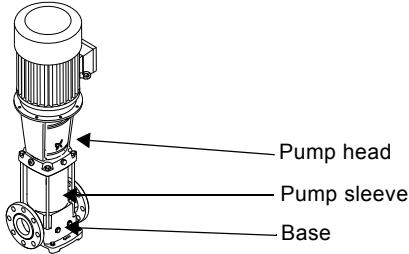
Hot surfaces on a CR, CRI, CRN pump
